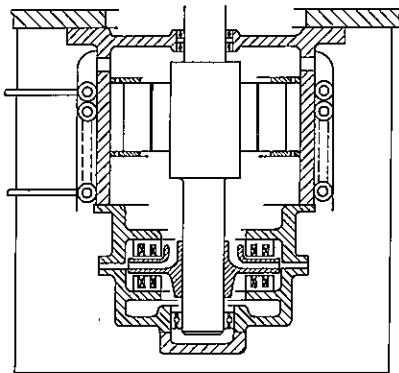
Axial magnetic bearing with integrated impeller for the cooling loop in the motor compartment.
